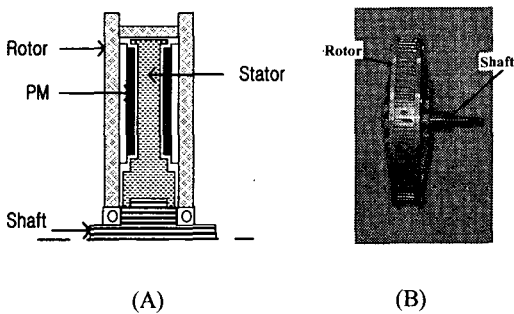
The developed AFPM motor for hybrid wheelchair (A) Schematic structure of AFPM motor, (B) The manufactured AFPM motor
